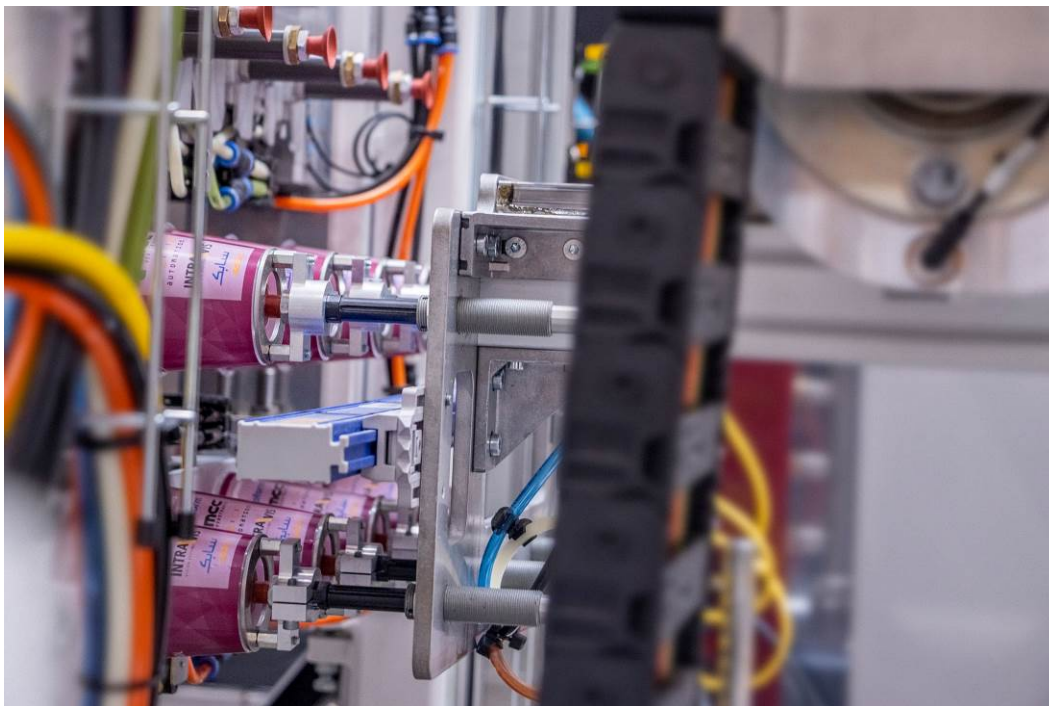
Removal of the thin-walled cups produced by the ICM process using the BECK parts removal gripper
